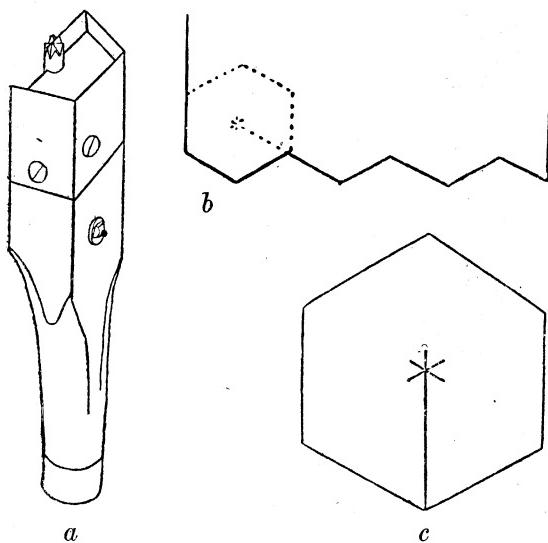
a*, Tool for cutting tarred paper pads; *b*, diagram showing how tool is used, the dotted line showing position of edge of tool; *c*, tarred paper pad in outline. *a*, *b*, One-fourth natural size; *c*, one-half natural size.
